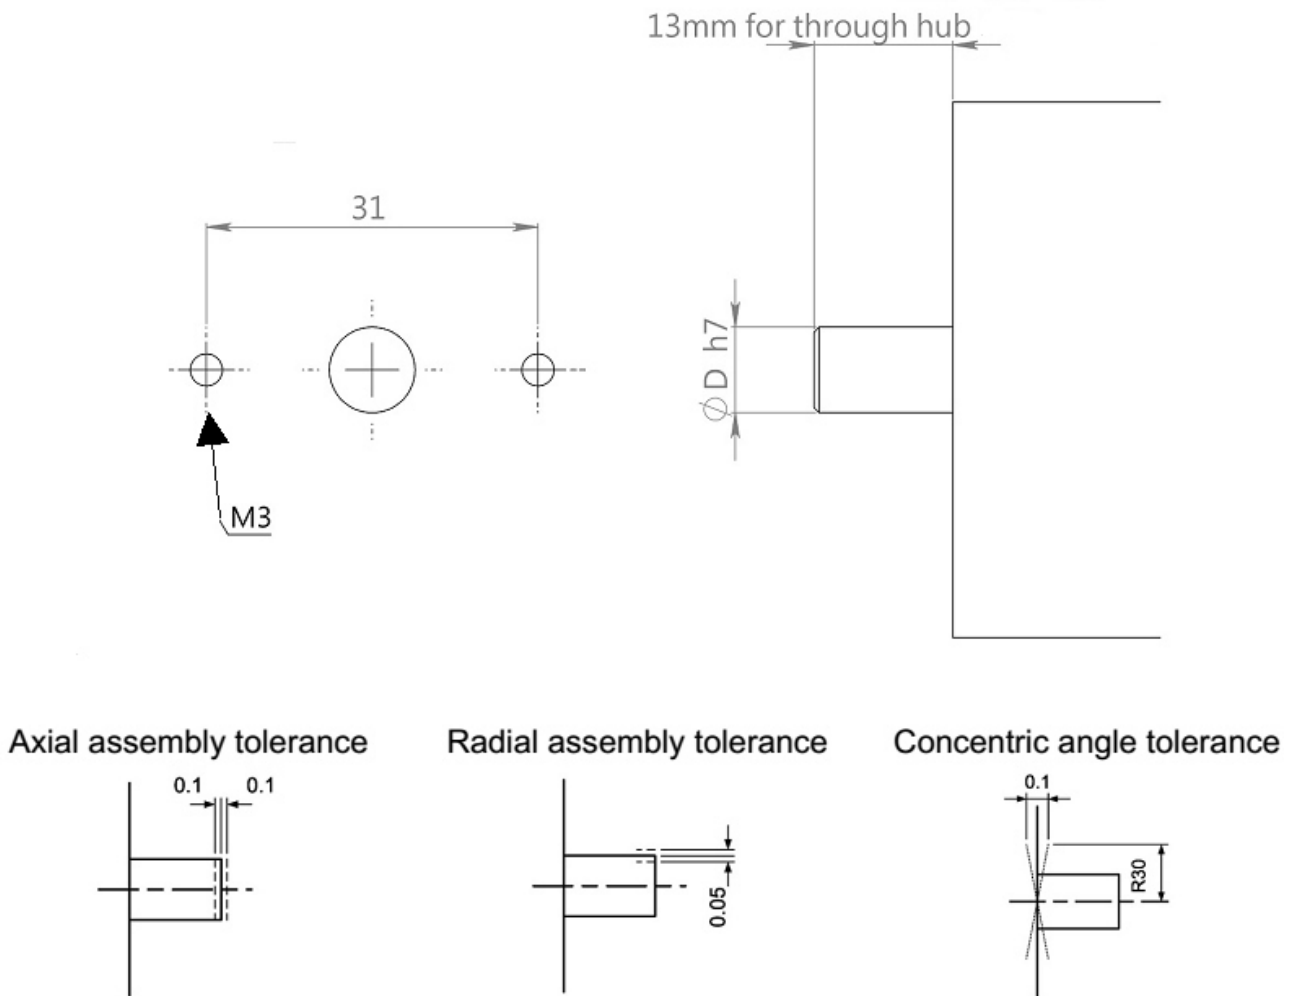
Required dimensions for motor assembly (units = mm) / $D = 6.35\text{mm}$
